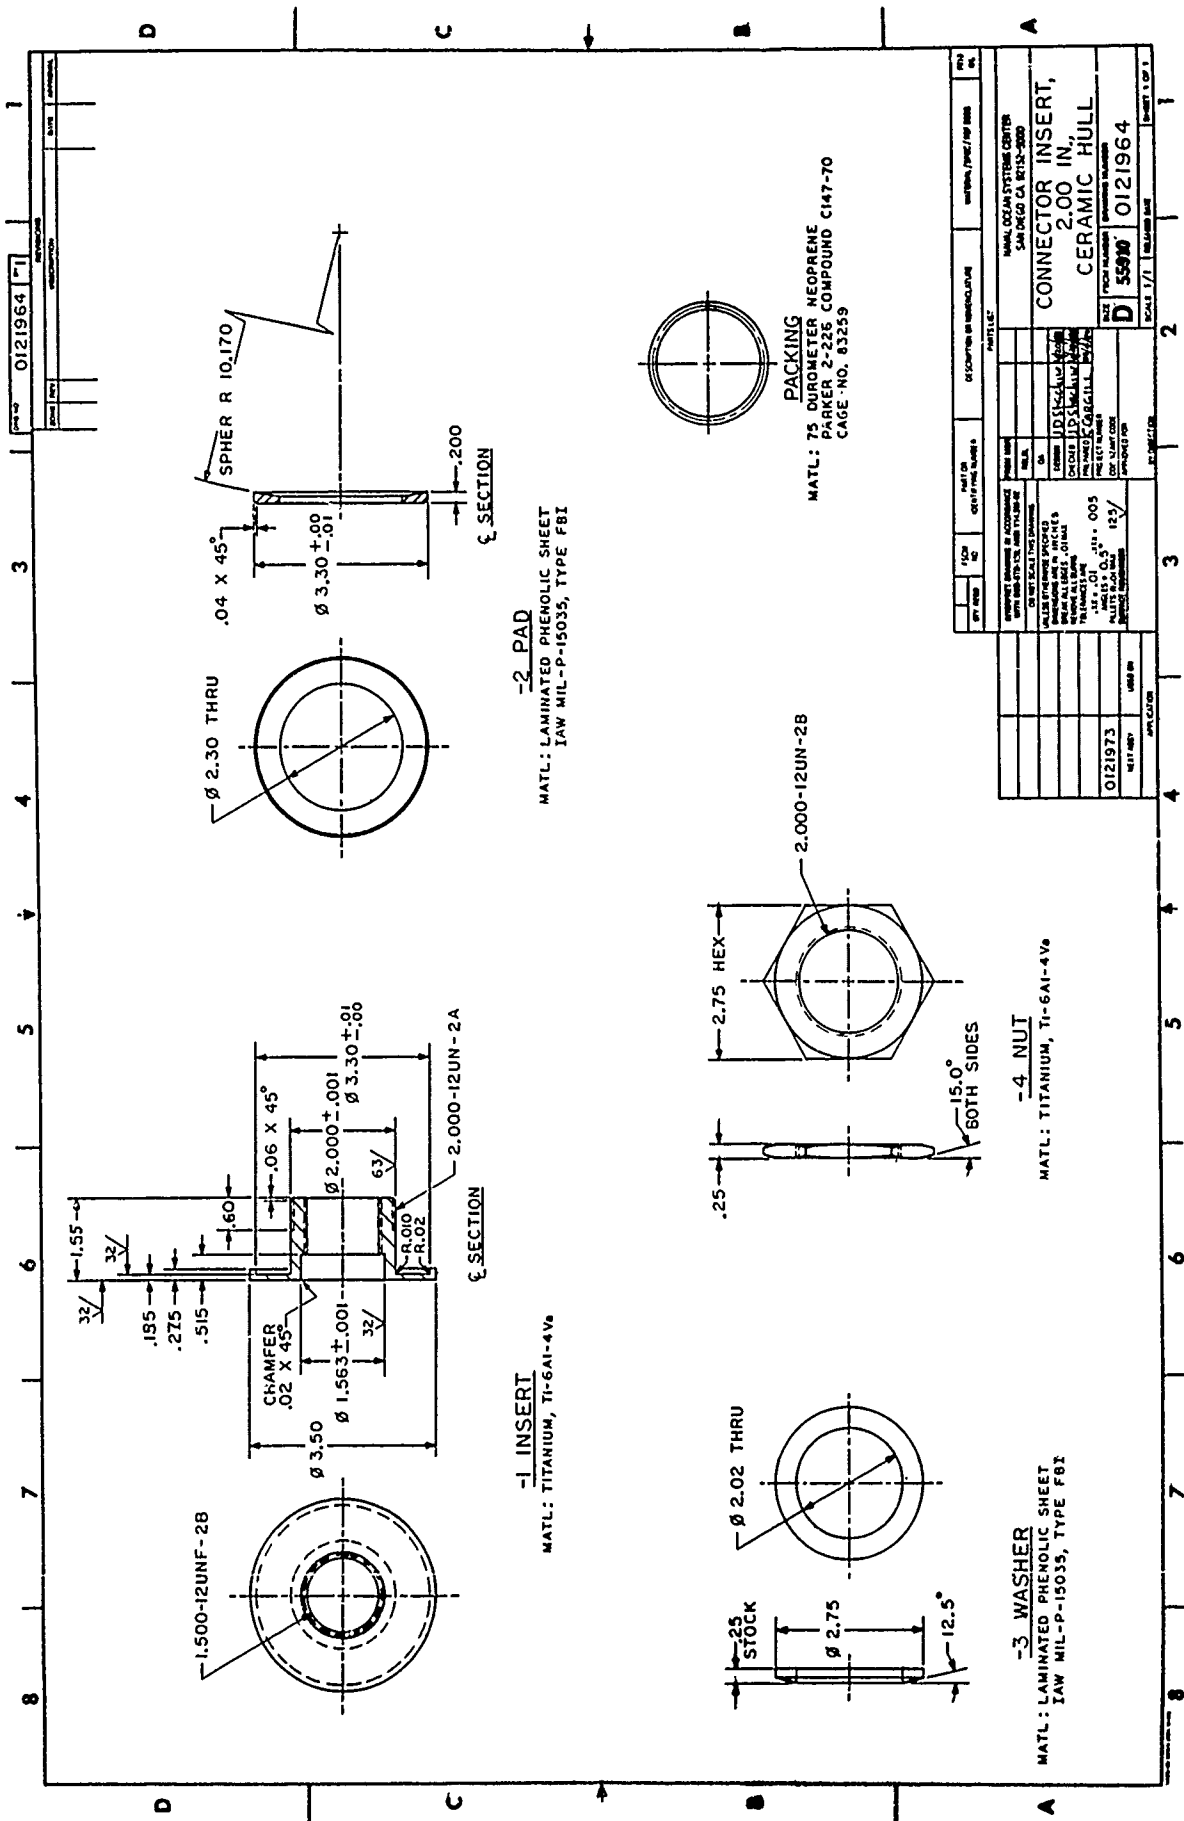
Fabrication drawing of 2-inch-diameter penetration inserts for 20-inch-diameter ceramic hemispheres; they were not used in the housing assembly.
